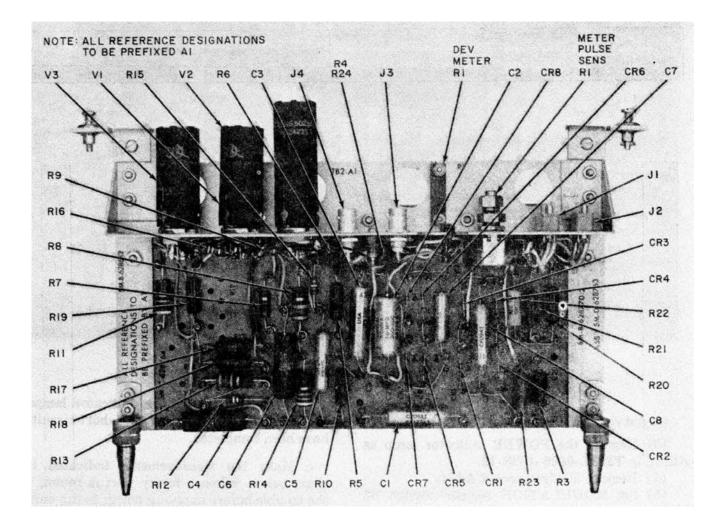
Terminal Board TB2-A1, parts location diagram.
